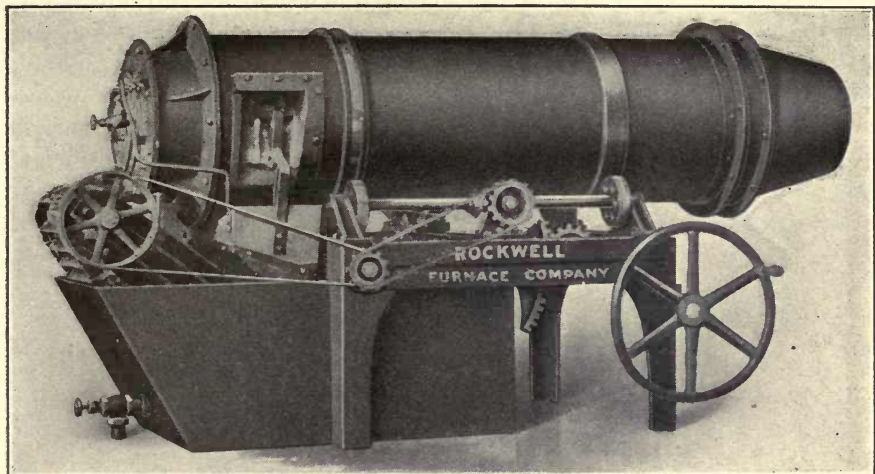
Automatic and continuous hardening furnace, with tilting mechanism.
